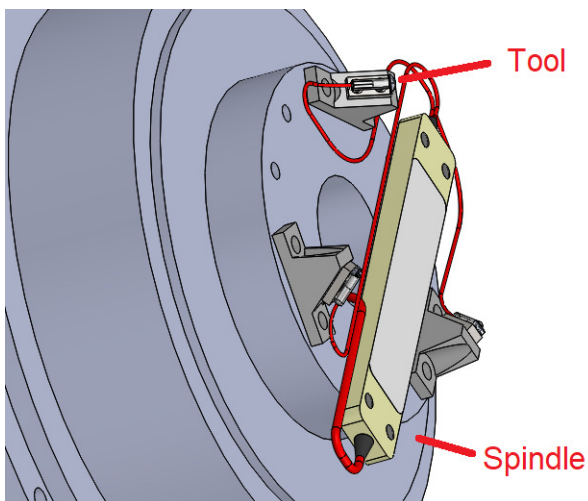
Tool Fixtures for Diamond Tools on Spindle
